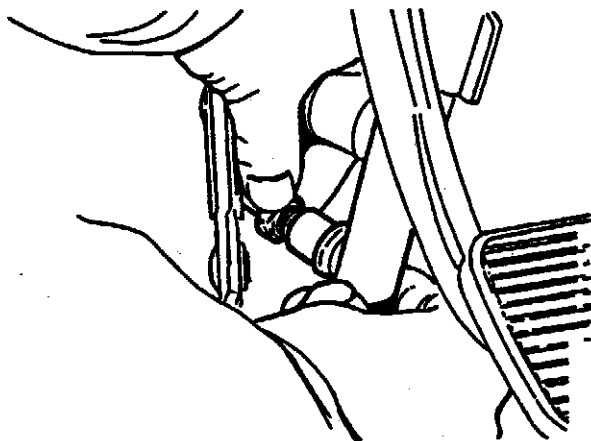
Screw the pressure pipe fitting into the master cylinder but do not tighten.
